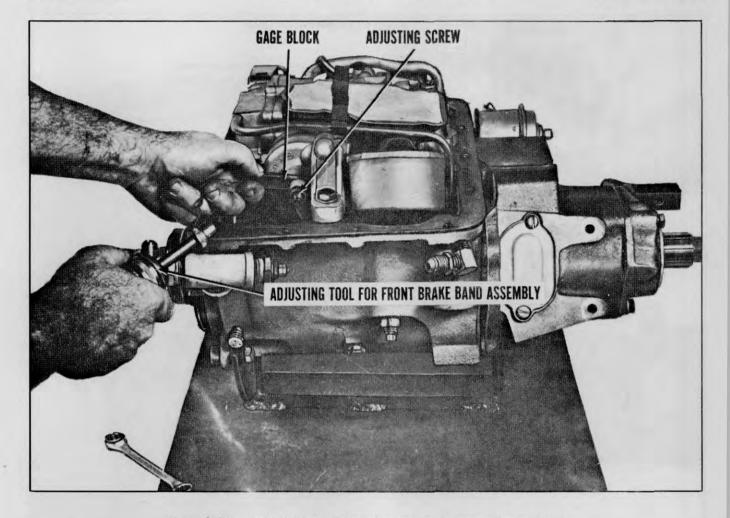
Pull Back On Adjusting Rod and Insert Gauge Block
